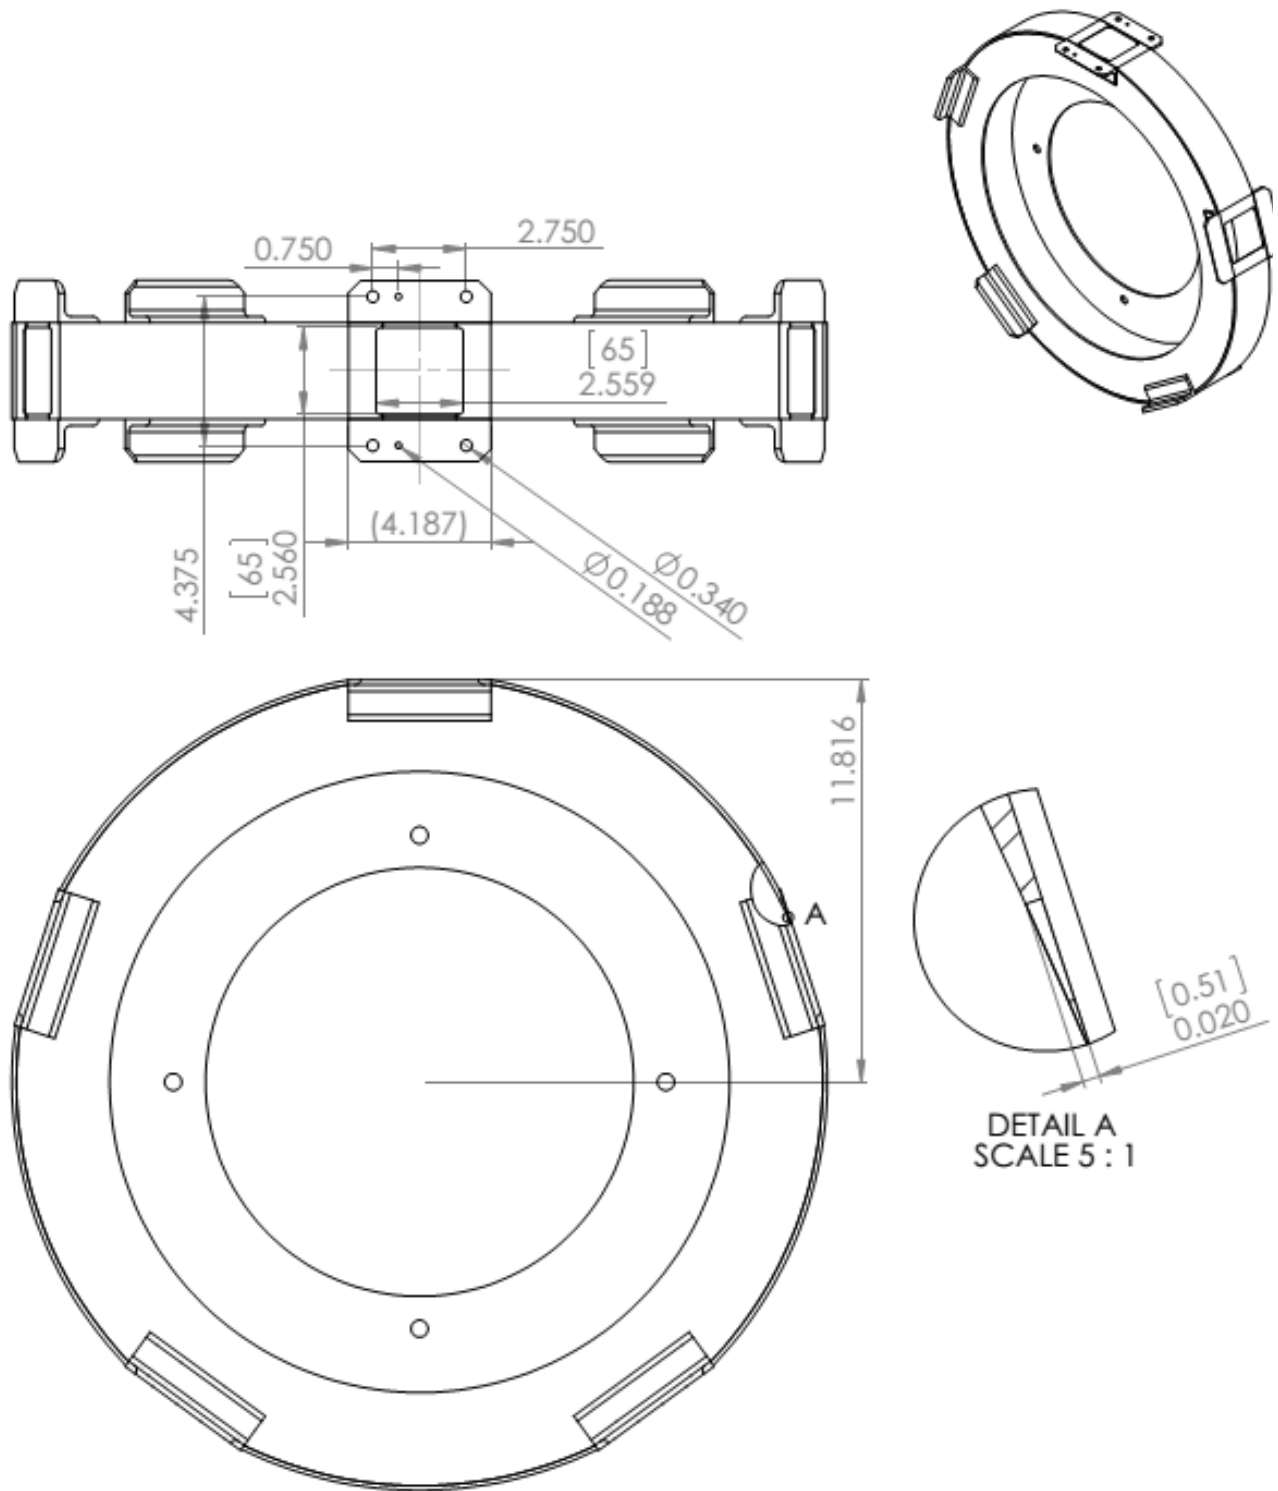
Detailed Dimensions of the Toroid Wheel (A,B, and C) with the Cuts
